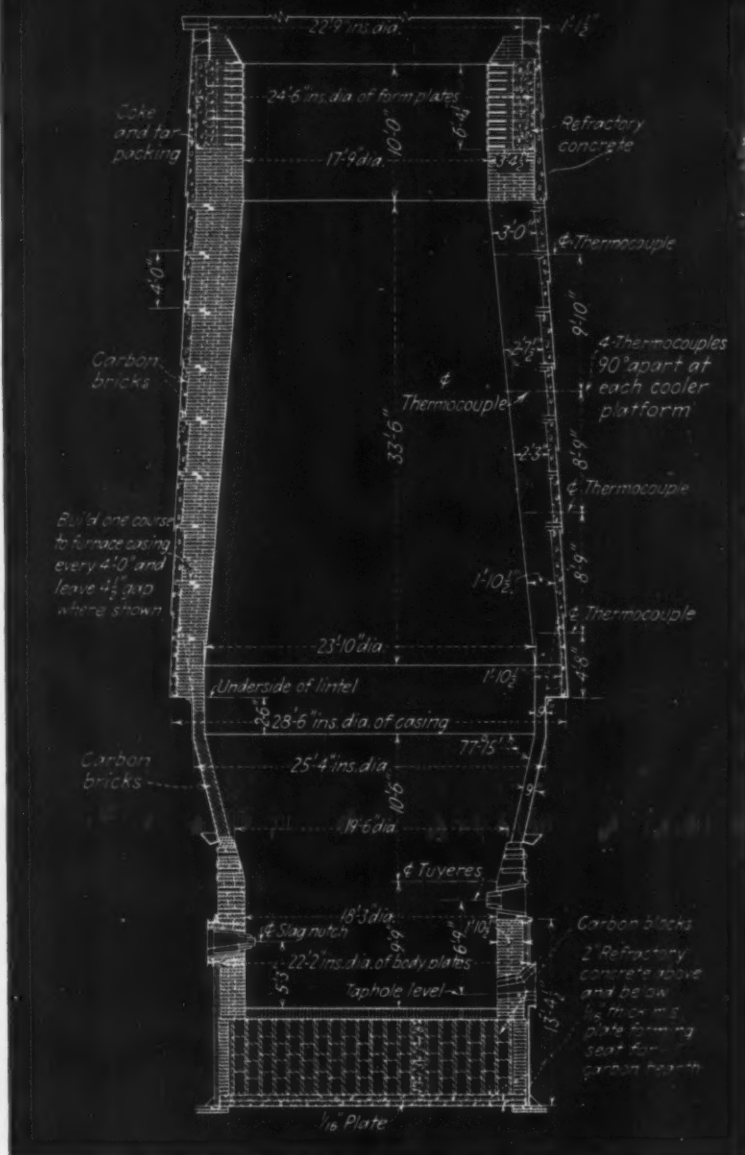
Cross-section of United Steel Companies' No. 6 furnace from bottom to throat, showing the all-carbon lining.
